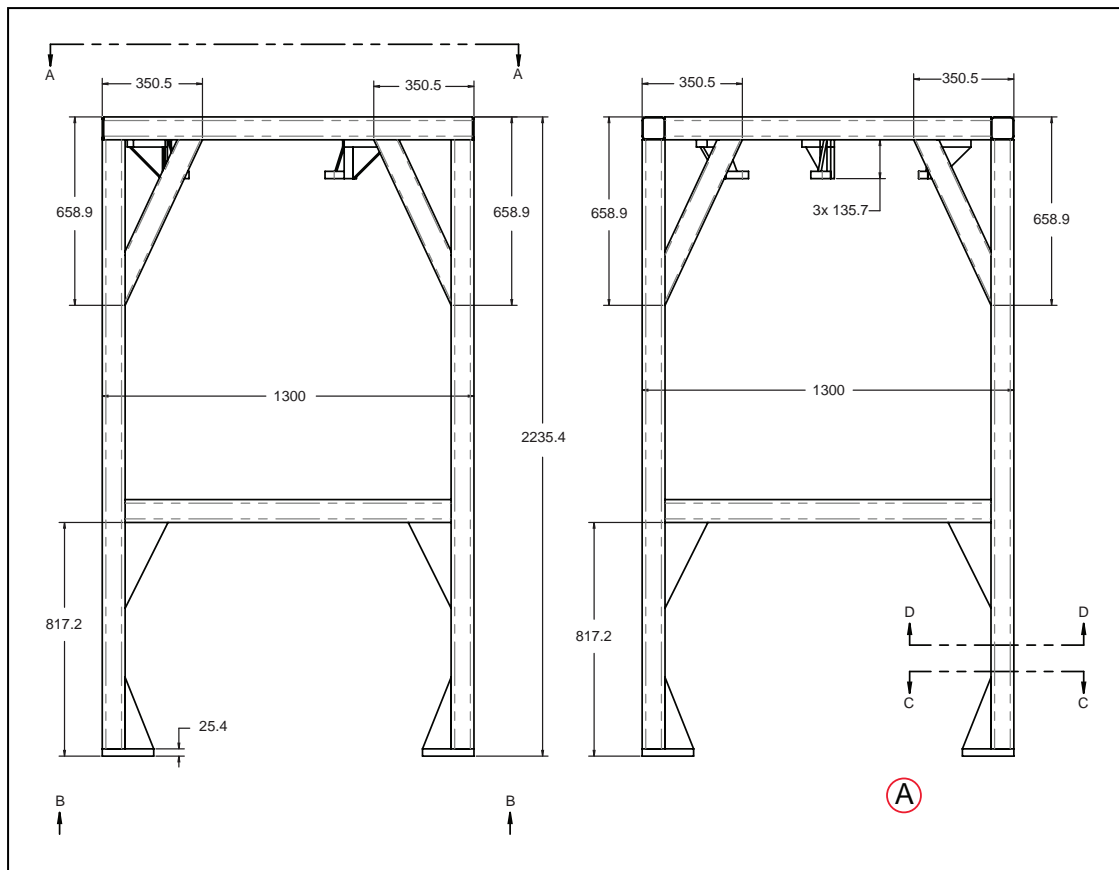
Mounting Frame, Side View 1, (A) Sections Shown in the Next Figure
